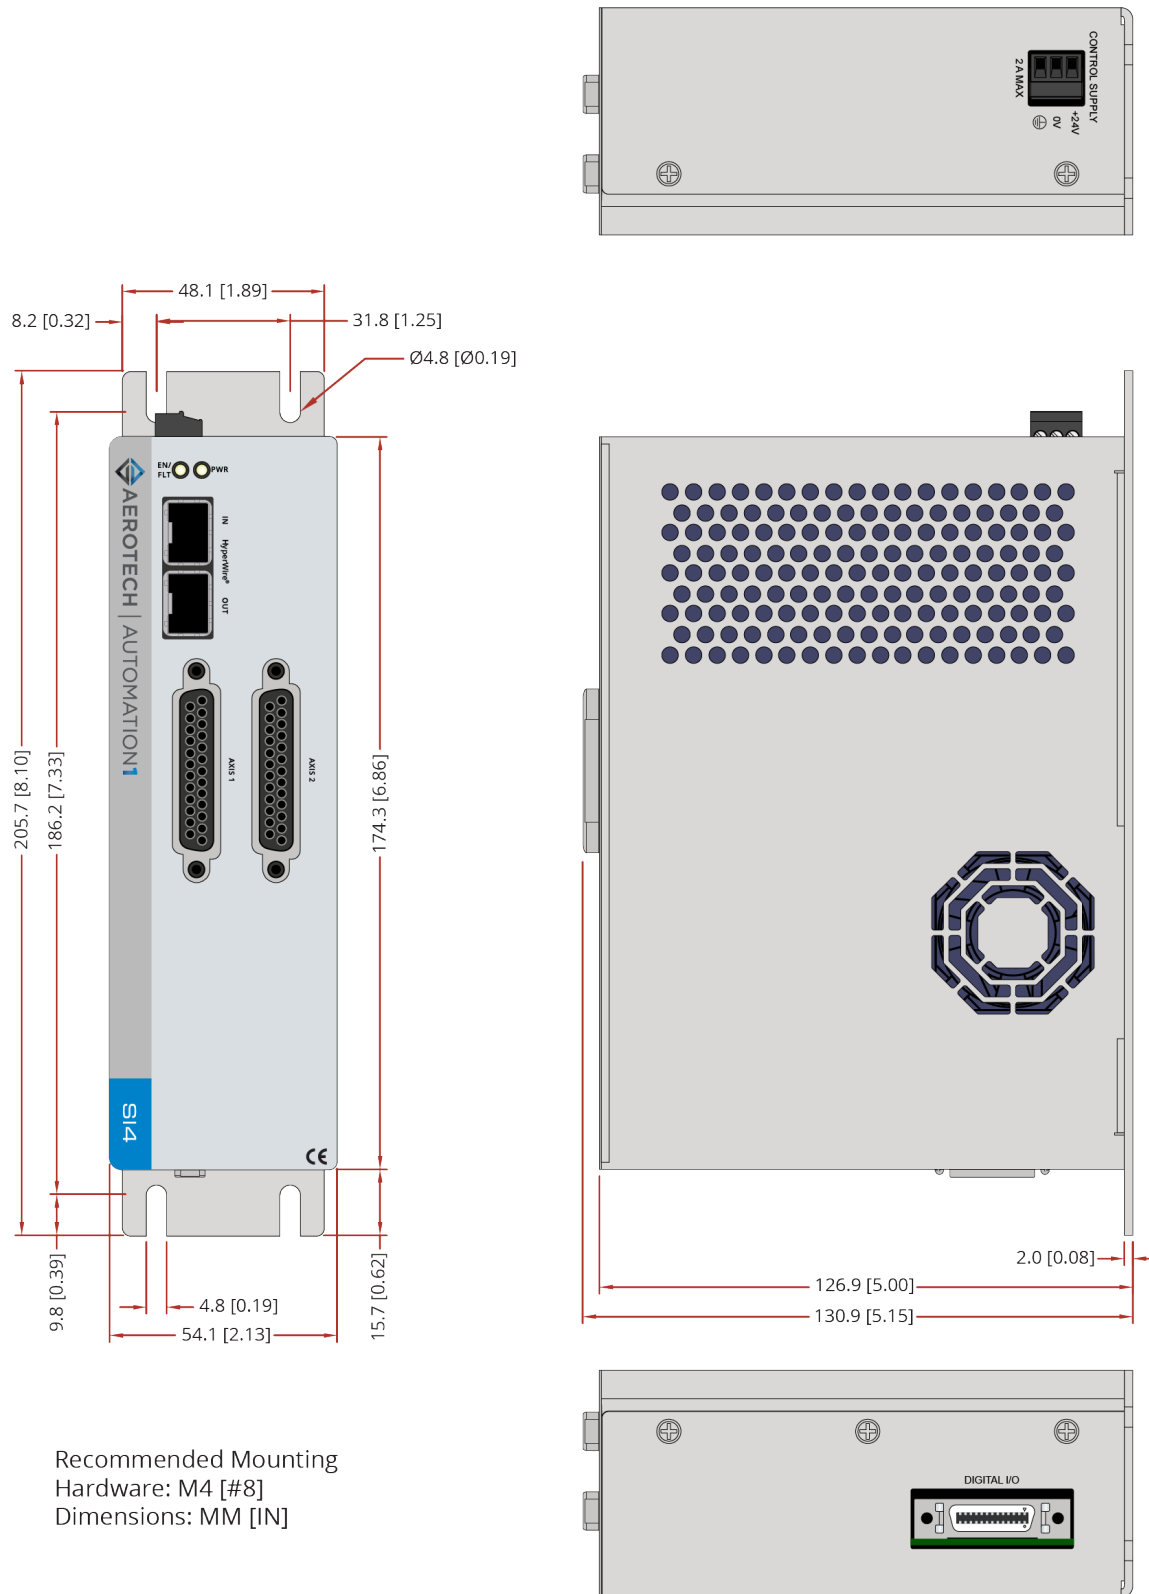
Dimensions [-4P1 (Standard 4-Axis)]
